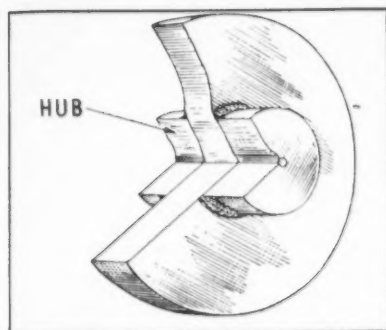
Simple gear blank is made by fillet welding the hub to the web. Parts are flame cut from steel plate.
